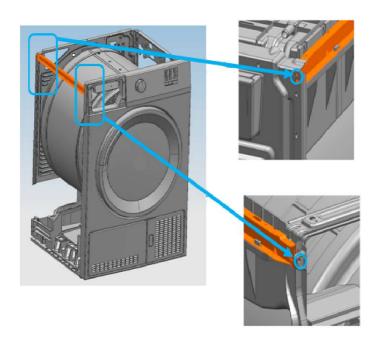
Connection points for Support Sheet Brackets on Left Hand Side (LHS)
